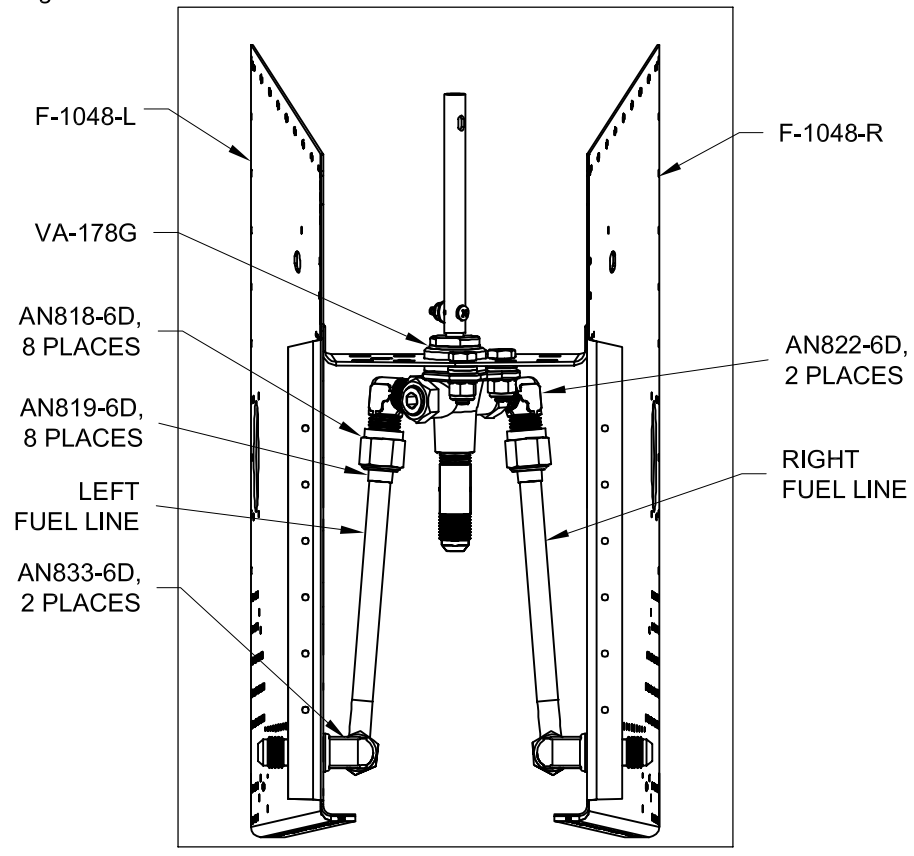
TUNNEL FUEL LINES AFT VIEW
